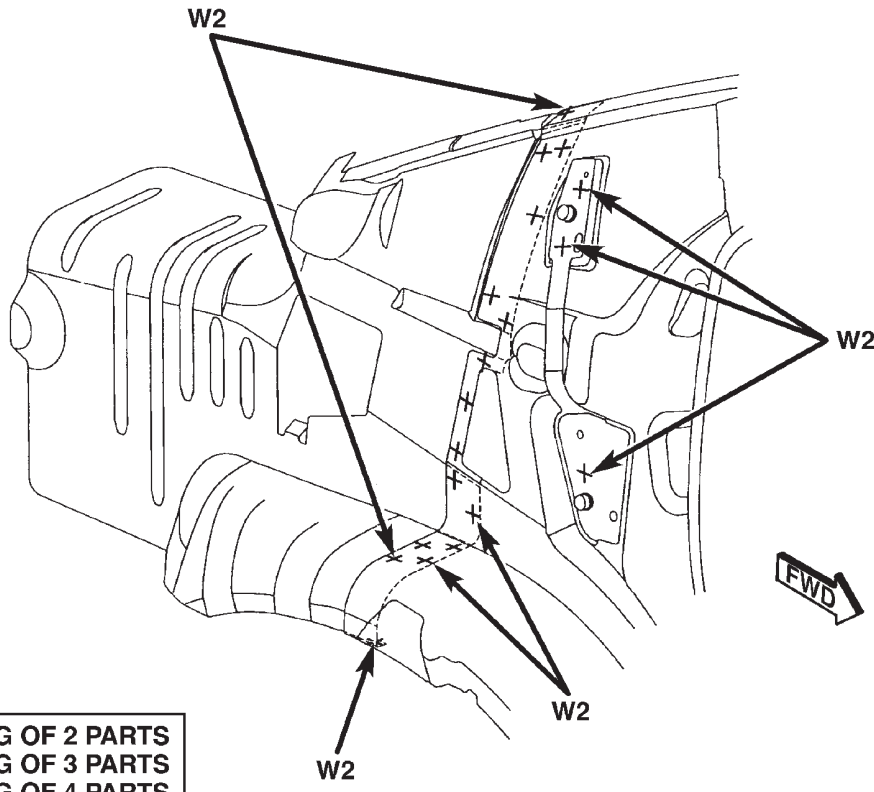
HINGE PILLAR REINFORCEMENT TO SILL BEAM TO SIDE SILL REINFORCEMENT 80c6232e
